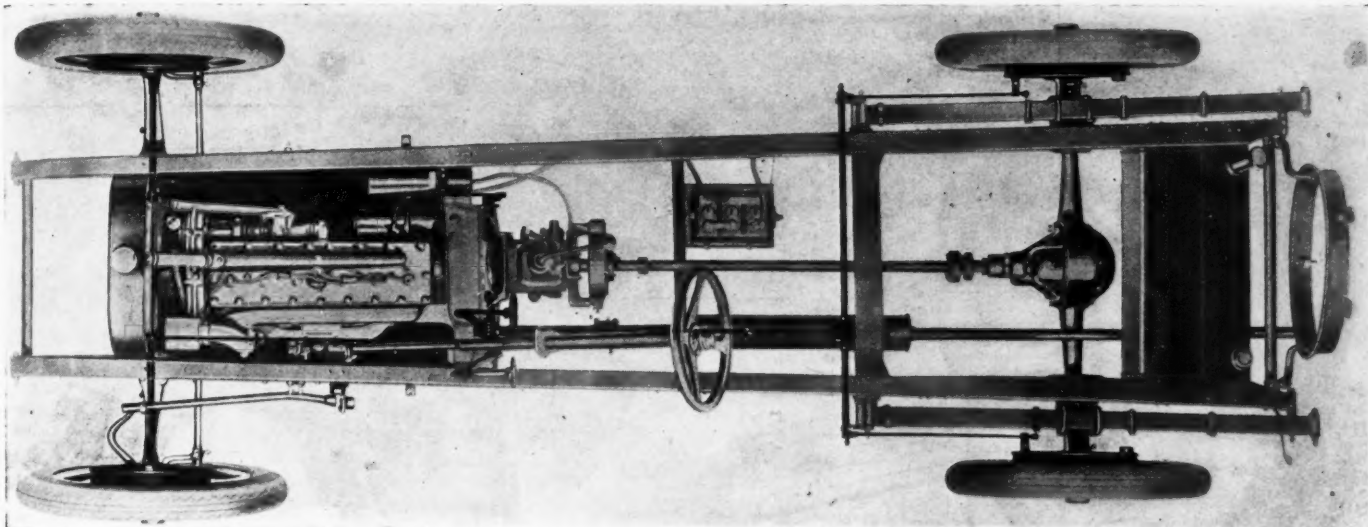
Brake hookup on Rickenbacker chassis with four-wheel brakes. Hand brake operates on propeller shaft only. Wheel brakes are equalized by differential gears on pedal shaft and rear cross shaft
